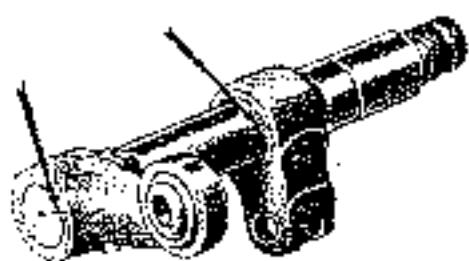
Register marks for filling the inside and outside arms onto the control shaft.
